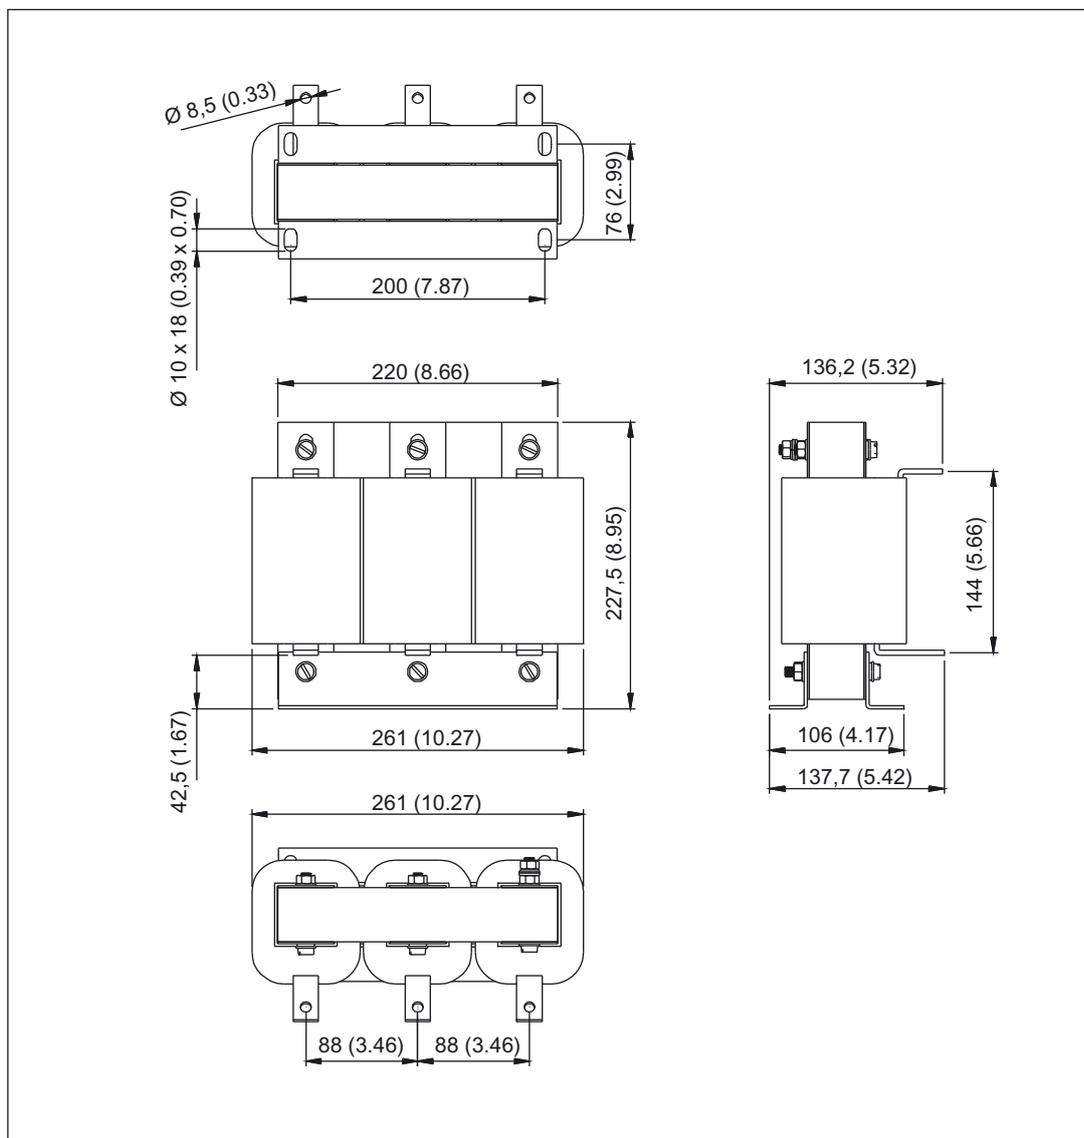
Dimension drawing: Line reactor for Basic Line Module (100 kW)
